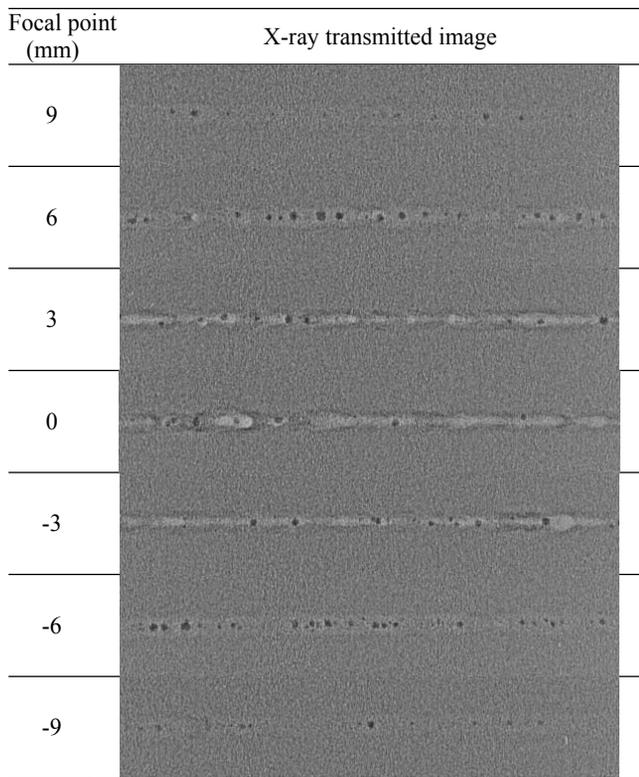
X-ray transmitted images for various focal positions (laser power: 3 kW, welding speed: 6 m/min)
